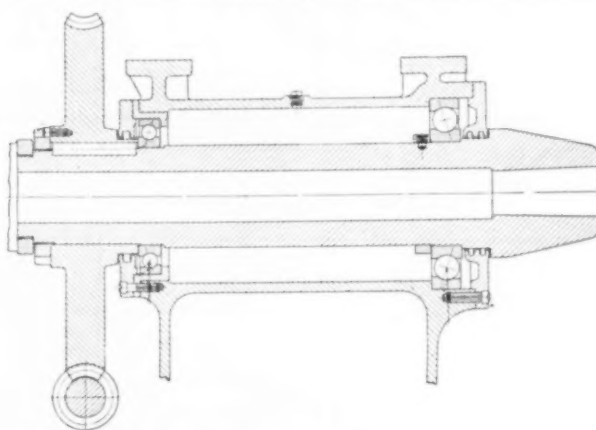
BALL-BEARING SPINDLE OF 16-IN. SHELL LATHE BUILT IN 1917
